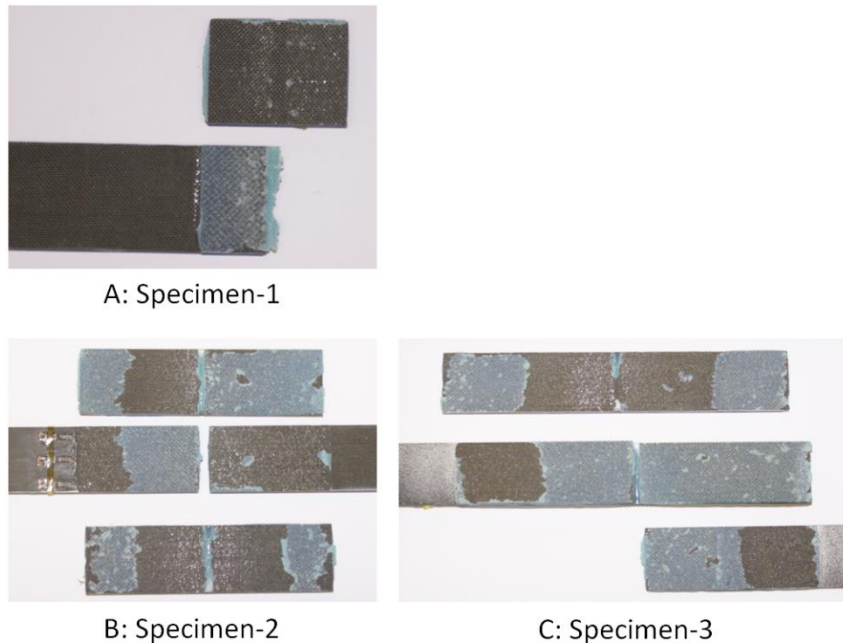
RSG Array-A Specimens. Bonded surfaces post testing.
